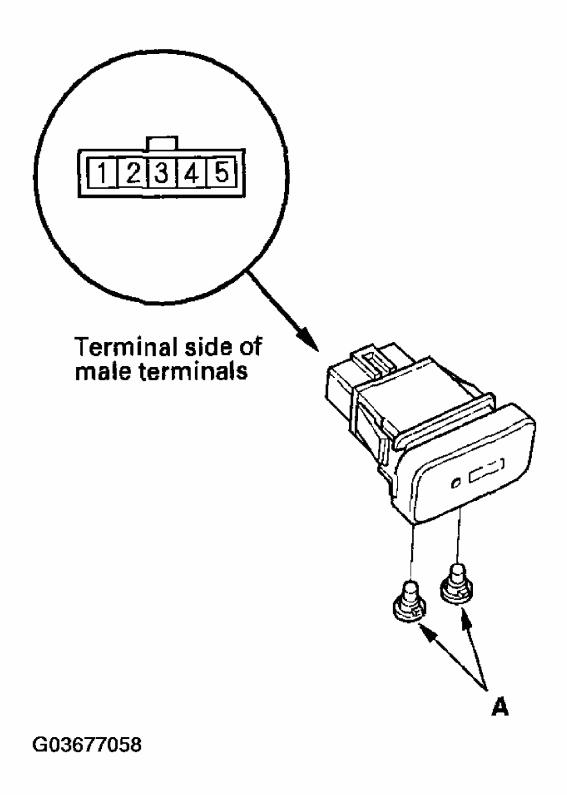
Identifying Connector Terminal Courtesy of AMERICAN HONDA MOTOR CO., INC.
